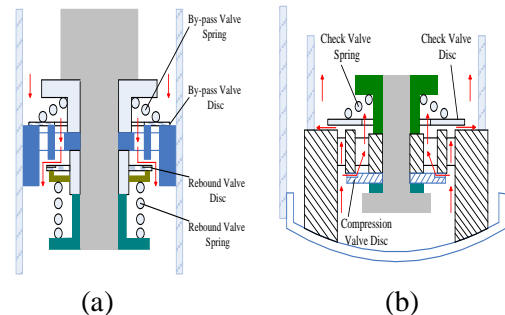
Fluid path through the piston valve and base valve during the rebound stroke
